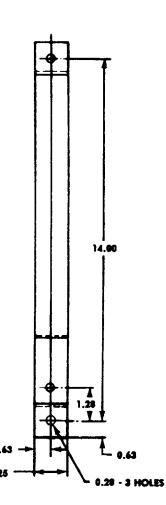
WALL SHELF BRACKET (PART NO. 7551731)
